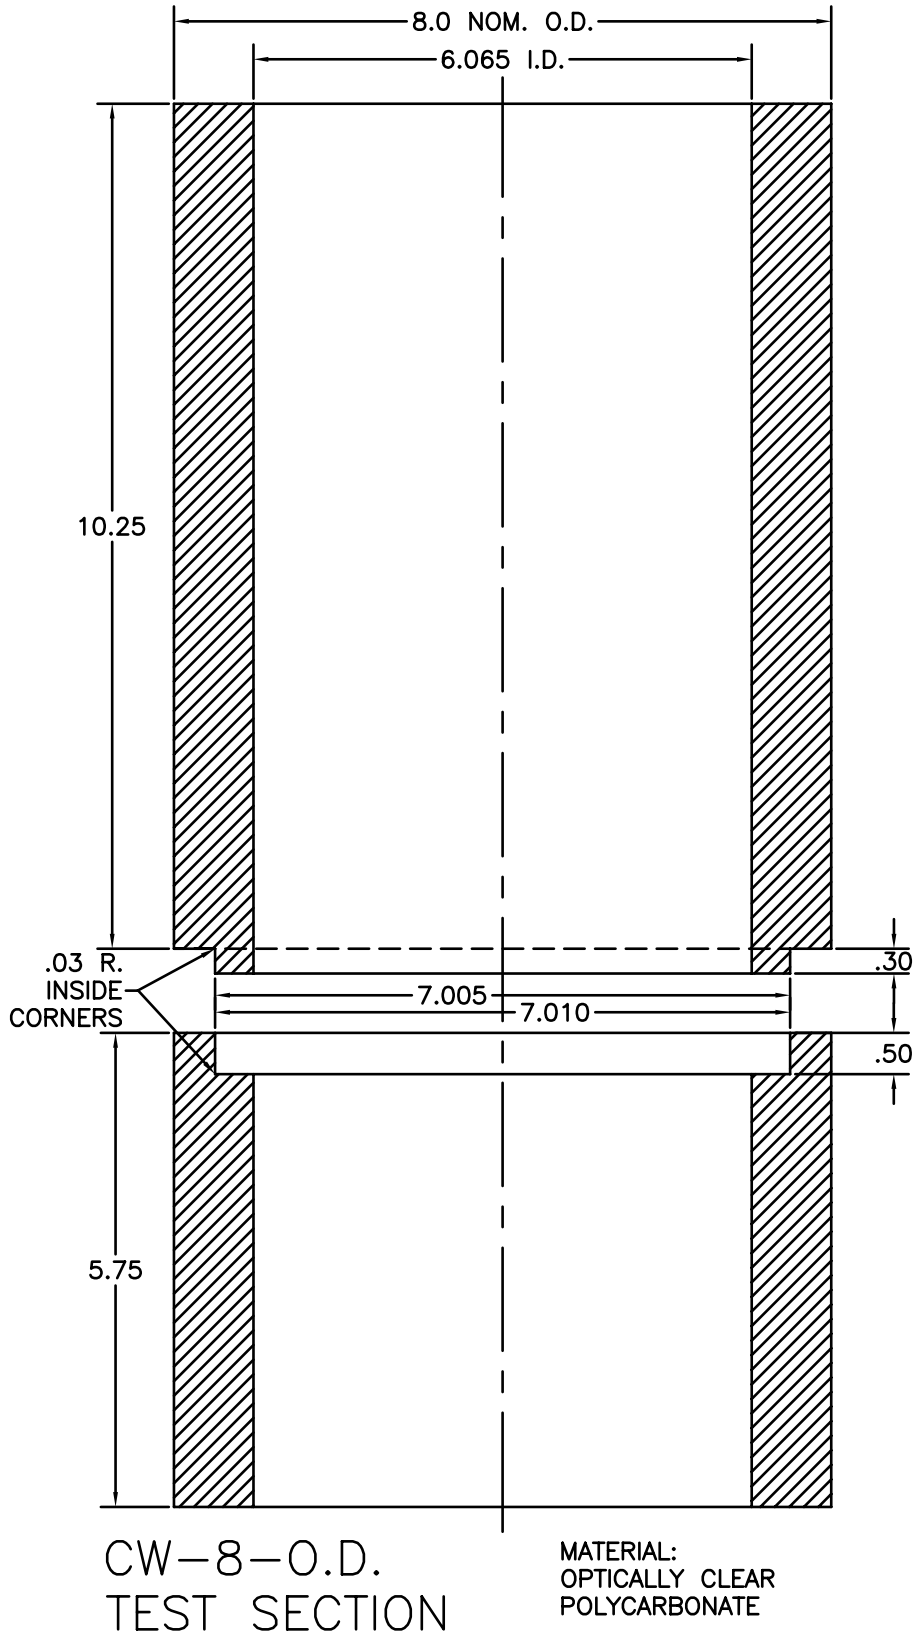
Schematic Detailing the Dimensions of the Transparent Test Section
